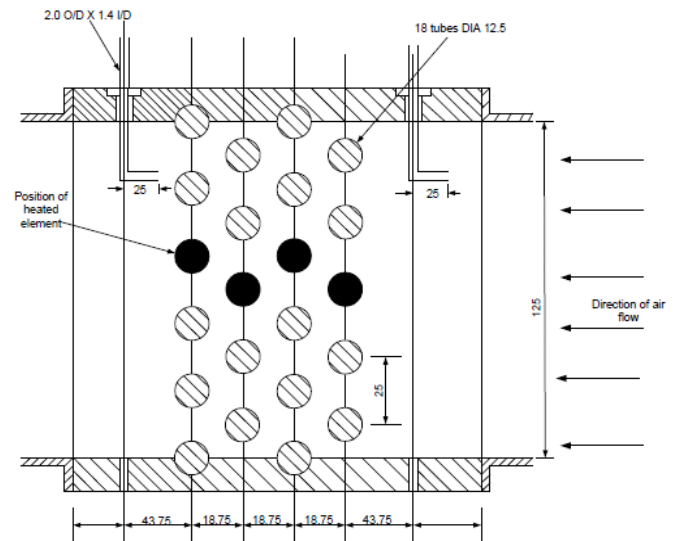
Nominal dimensions of the working section with staggered tube arrangement
